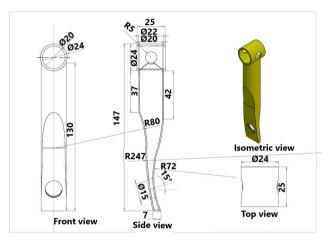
Different views of the rotor holder of the weeder (all dimensions are in mm).
